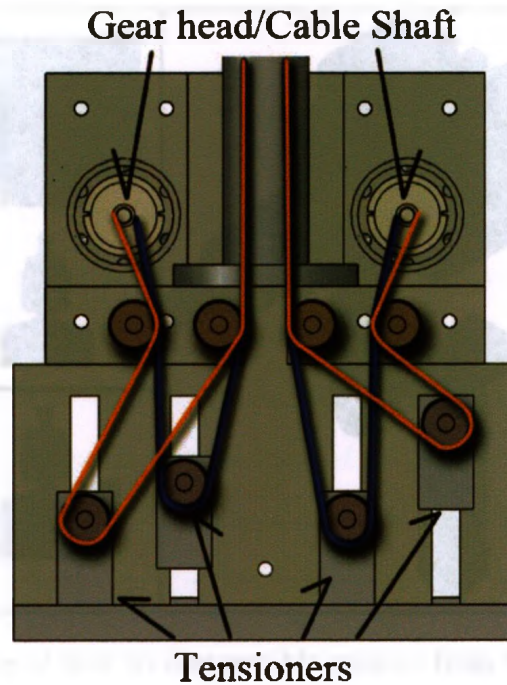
Cable routing in the motor housing from the end effector to the gear head shafts. The two cable routes on the left cable shaft attach to the Front Slider. The two cable routes on the right cable shaft attach to the Back Slider.
